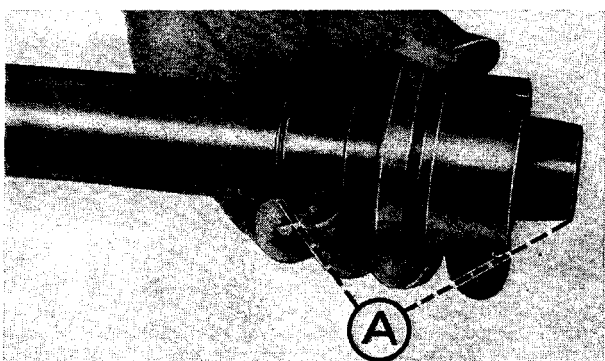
Slipping the threaded ring (with the packing ring already pressed in place) on the guide tube by means of an assembling sleeve „A“
